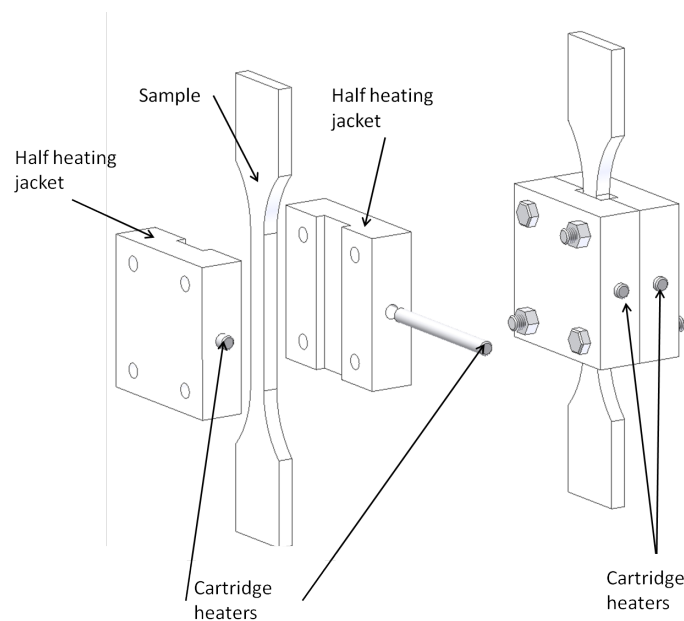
CAD model of the tensile test furnace adopted at Newcastle University: left side exploded view, assembled view; picture reproduced from (Browne et al., 2006).
